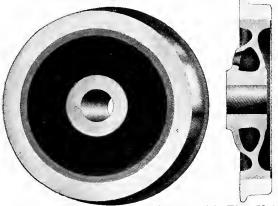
Cast Iron Plate Center with Tire Held by Shrinkage and Shoulder.
